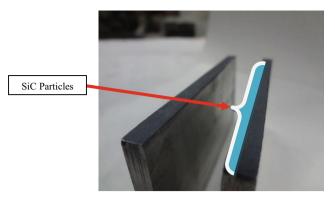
Evenly distributed SiC particles on the welding sides of Al 6351 alloy plates
